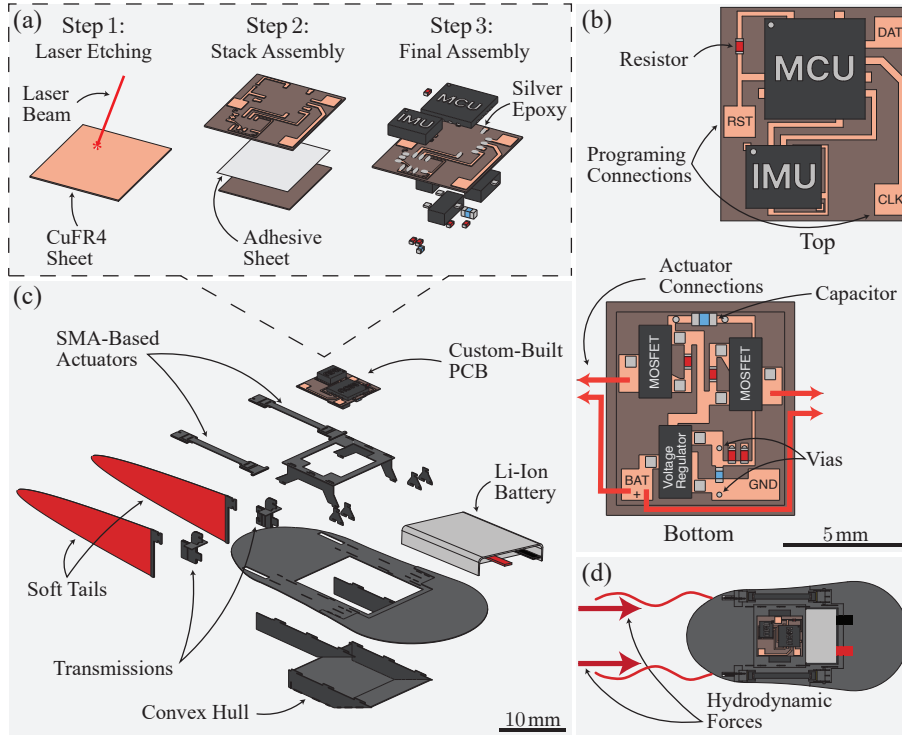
Design and fabrication of the VLEIBot⁺⁺. (a) Fabrication process of the robot's custom-designed PCB. In Step 1, sheets of CuFR4 are etched using laser rasterization in order to remove areas of the Cu-coating and thus create the patterns designed for each side of the PCB. In Step 2, the two sides of the PCB are pin-aligned and adhered together with a sheet of Pyralux adhesive by applying pressure and heat inside a curing oven. In Step 3, the off-the-shelf elements composing the interconnected power, actuation, and computation circuits are installed on the two sides of the PCB using conductive silver epoxy (MG-Chemicals 8331D) and cured inside an oven. (b) Top and bottom of the robot's PCB. The top side of the PCB supports an MCU for computation and an IMU for sensing. The bottom side of the PCB supports two N-channel MOSFETs and a voltage regulator. The two sides of the PCB are connected through *vias*. Decoupling capacitors and pull-up/down resistors are necessary to ensure the functionality of the circuits. (c) Exploded view of the VLEIBot⁺⁺'s design. This robot is composed of six main types of components: (i) two bare SMA-based microactuators of the type described in [2] with passive hinges installed at their ends; (ii) two soft propulsors that propel the microswimmer forward; (iii) two transmissions that amplify the output displacements generated by the robot's actuators into the two significantly larger stroke angles required to excite the two soft propulsors of the swimmer; (iv) a convex hull made of CF that provides a buoyancy force to support the microswimmer on water; (v) an 11-mAh 3.7-V 507-mg single-cell Li-Ion battery (Powerstream GM301014H); and, (vi) the custom-built PCB described in (a). (d) Swimming mode of the VLEIBot⁺⁺. The two bare SMA-based microactuators undulate the tails of the swimmer to produce the hydrodynamic forces required for forward propulsion.
